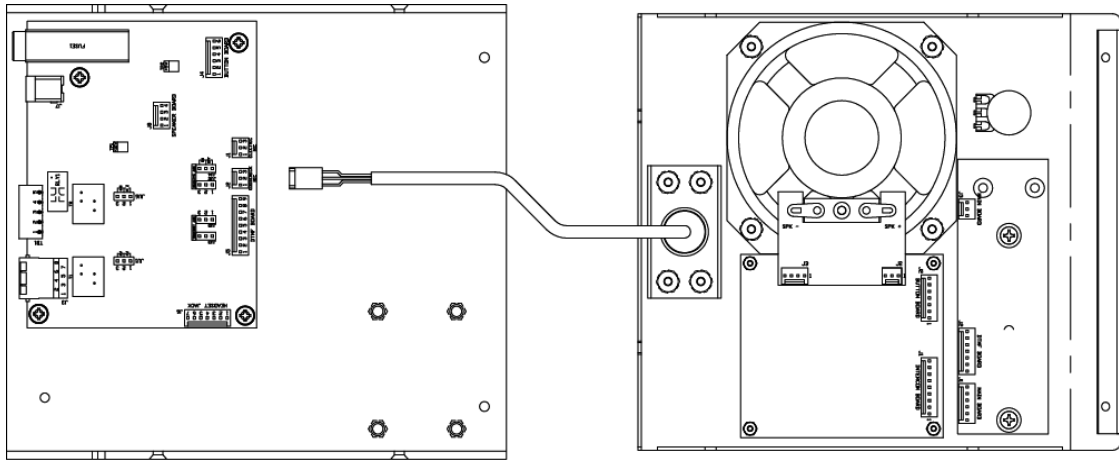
GOOSENECK ASSEMBLY INSTALLATION, GOOSENECK CABLE CONNECTION
